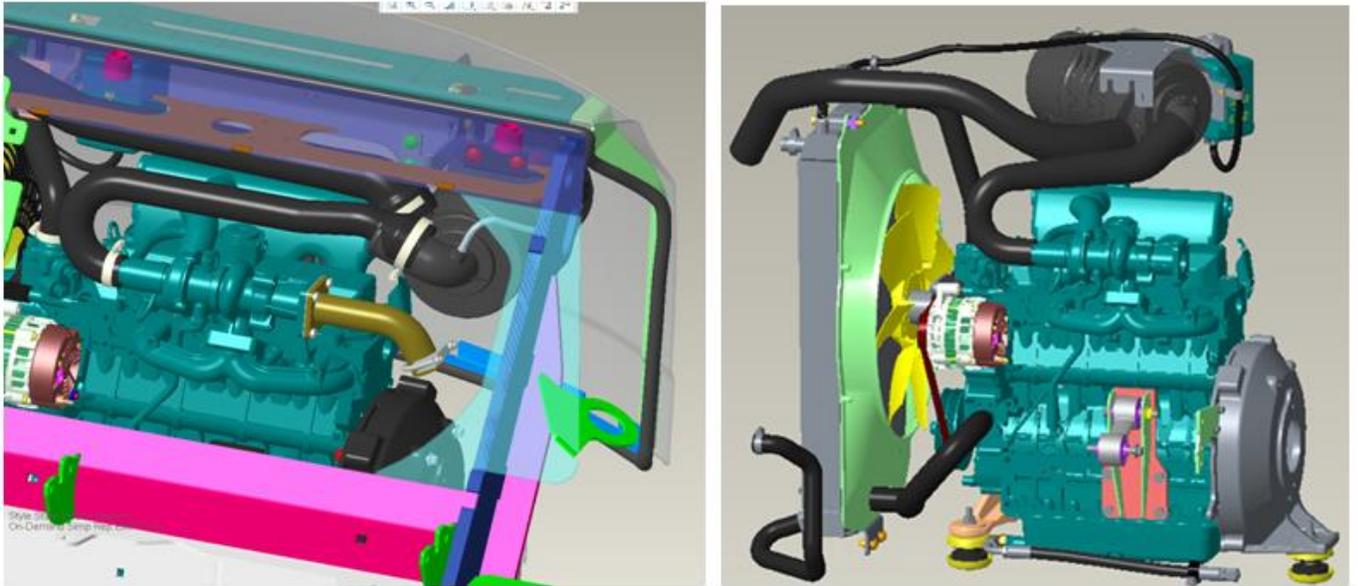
Air filter location in machine 2 (left image) and in new machine (right image)
